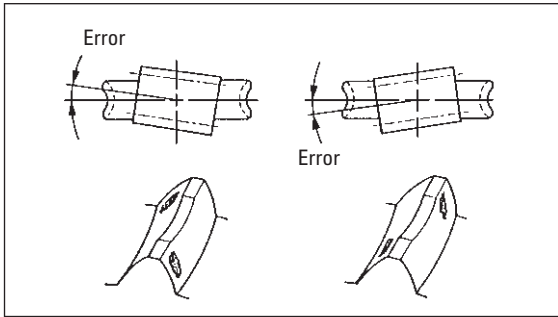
Poor Contact Due to Shaft Angle Error
